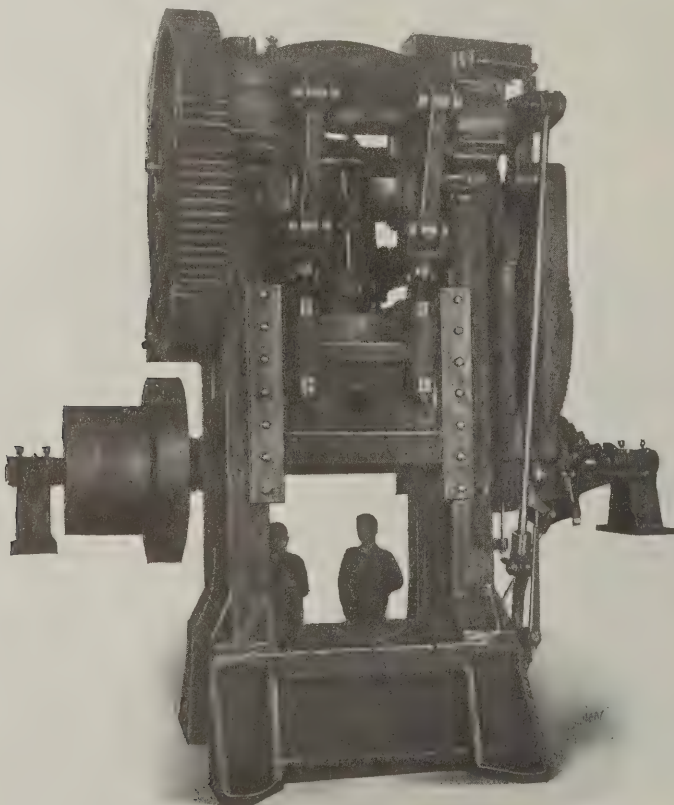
Large Toggle Drawing Press built by E. W. Bliss Co.
